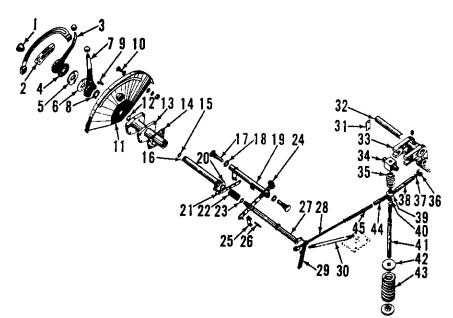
Exploded view of control levers, quadrant and the draft and position control linkage.
